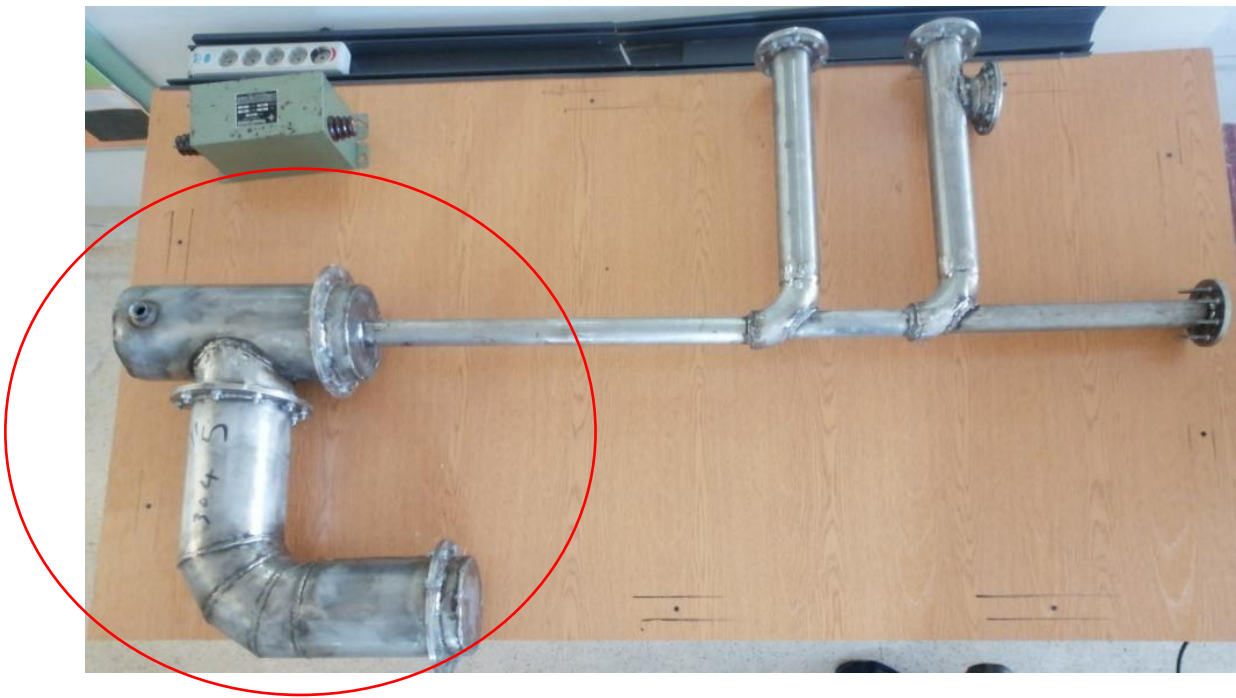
The assembled prototype, where the mass spectrometer is integrated
